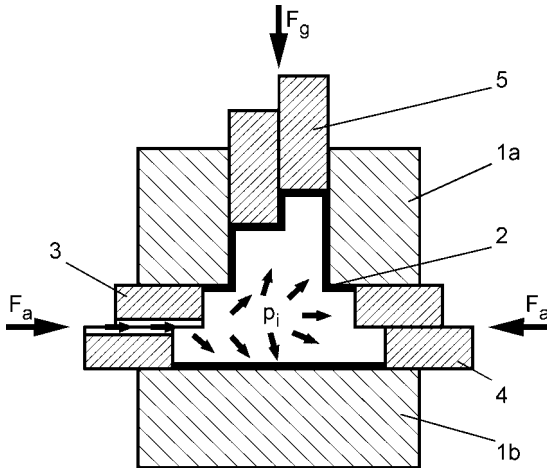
Hydroforming: operation step—expansion. F_a , closing force; F_g , counter force; p_i , internal pressure; 1a, upper die half; 1b, lower die half; 2, workpiece (tube); 3, mandrel (with inlet for the secondary hydraulic fluid); 4, mandrel; 5, counter pressure punch.
